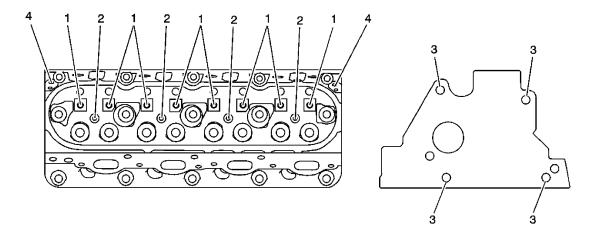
Cylinder Head - Top/End Views Courtesy of GENERAL MOTORS CORP.
